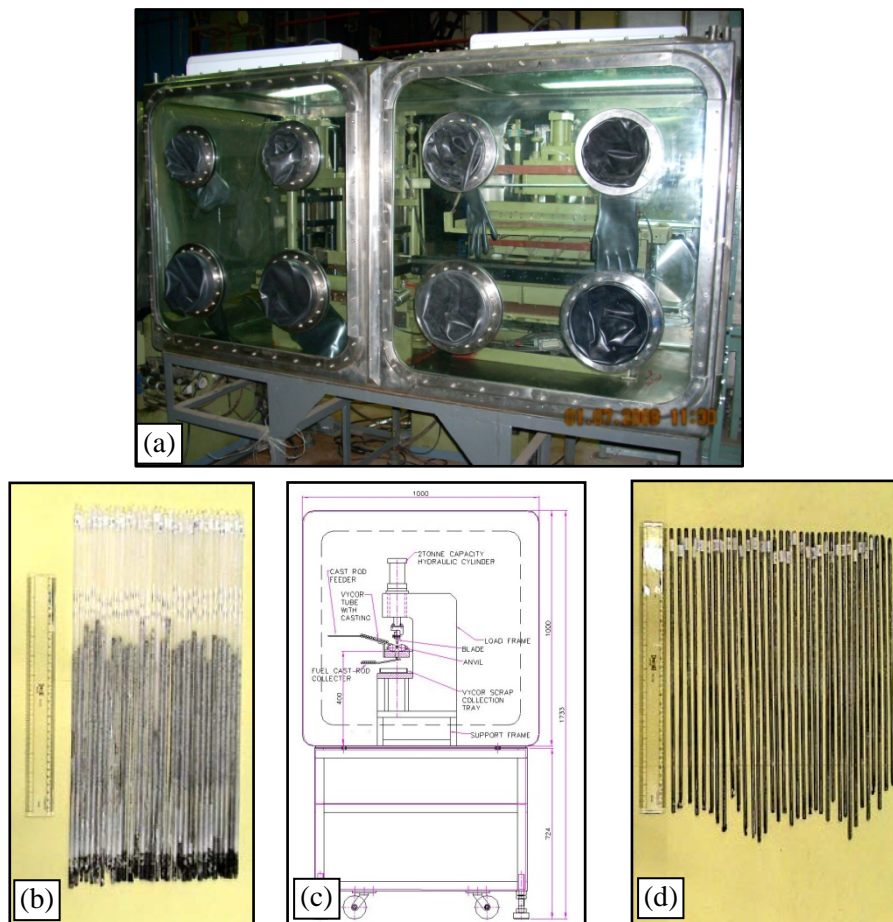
Demoulding operation; (a) Demoulding machine installed in glove box, (b) Cast slugs with moulds, (c) Sketch of demoulding machine with glove box, (d) Cast slugs after demoulding
